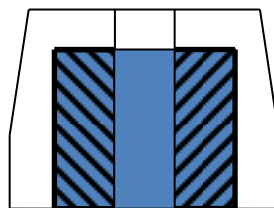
Sectional view of the BB assembly with the BC in blue and its inhibitor sheath in black
